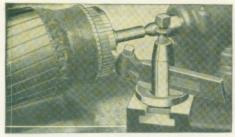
The lathe is the practical tool for truing armature commutators. Machining the commutator smooth and true is a precision job and should be done on a screw cutting lathe with power feed to obtain satisfactory results.
